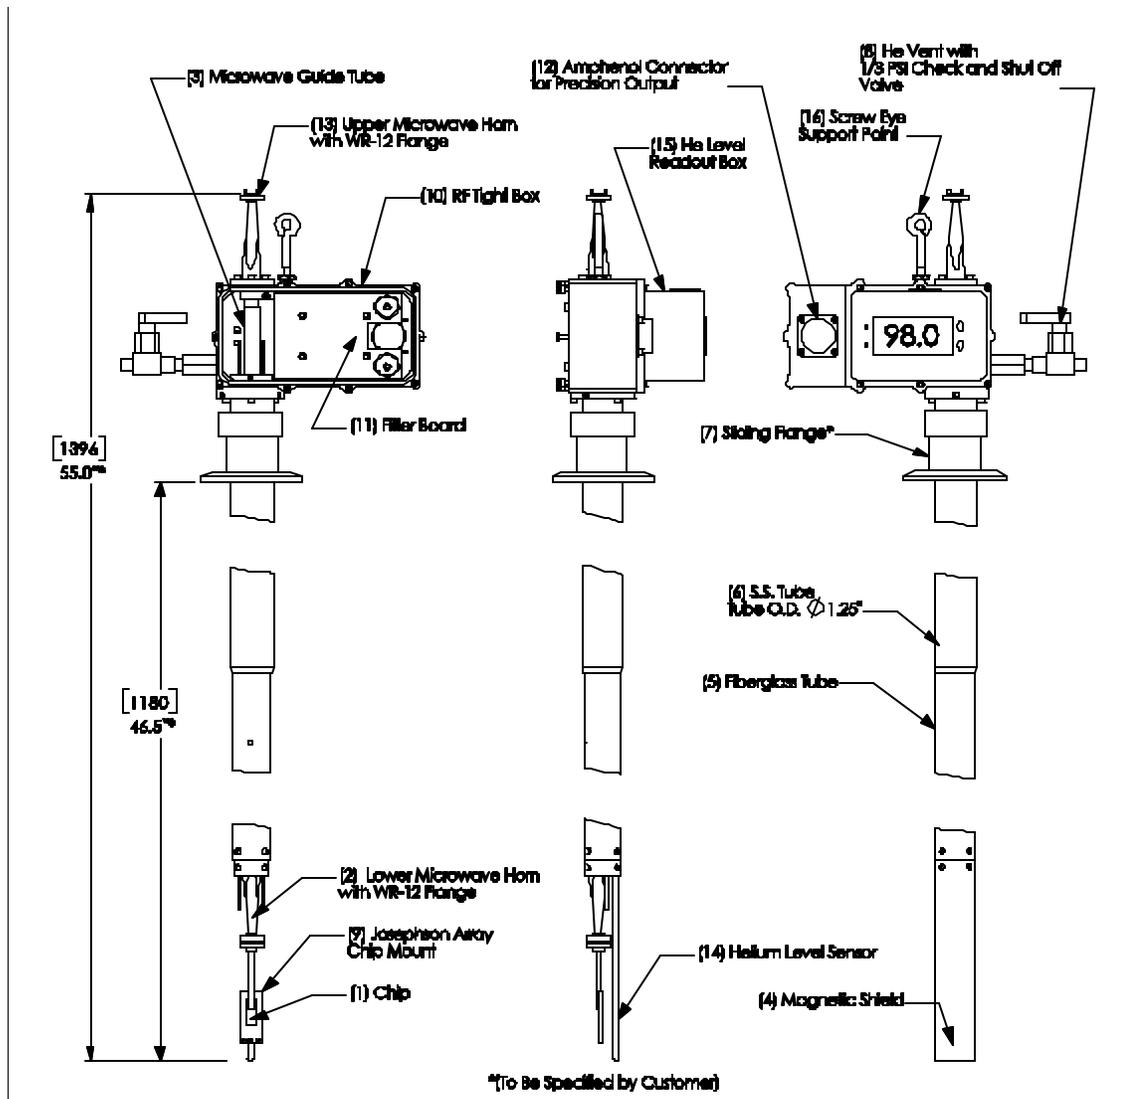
Mechanical drawing of the CP-525 Cryoprobe
